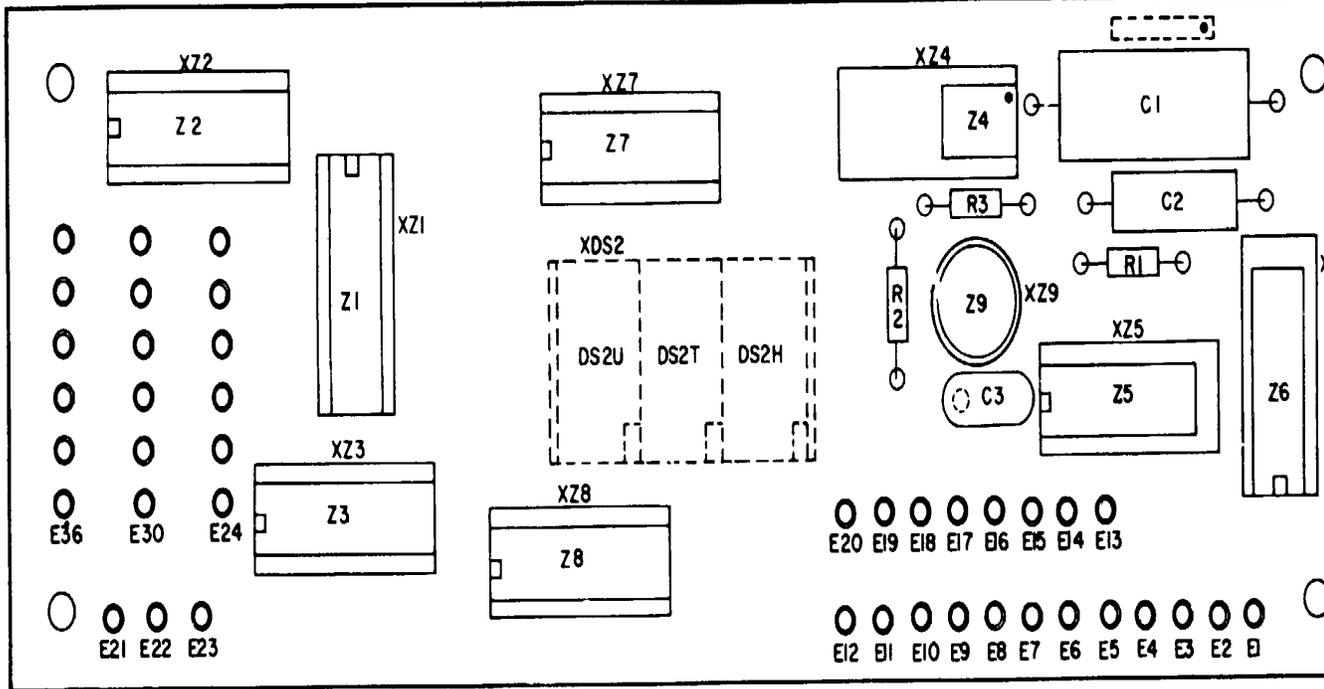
TIG assembly PC card No. 12-90082 (A7A1, A8A1), opponent location diagram.
